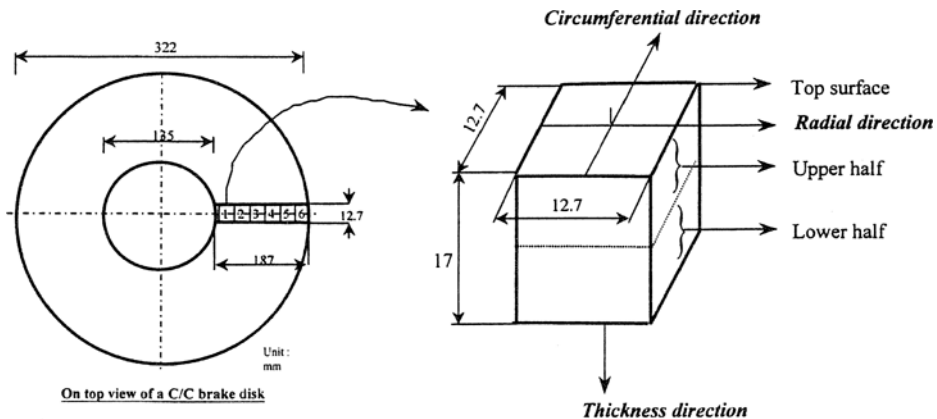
Dimensions of the brake disk and location of the six small cut-out pieces
